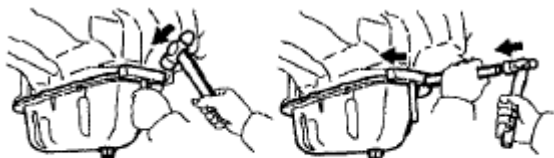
Locating No.2 Oil Pan Sub-Assembly
